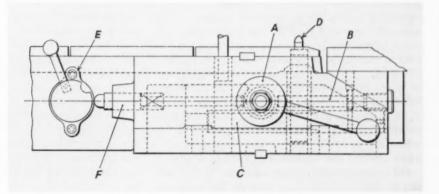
(Left) Standardized design of retractable locating pin fixture interlocked with a two-way hydraulic valve
